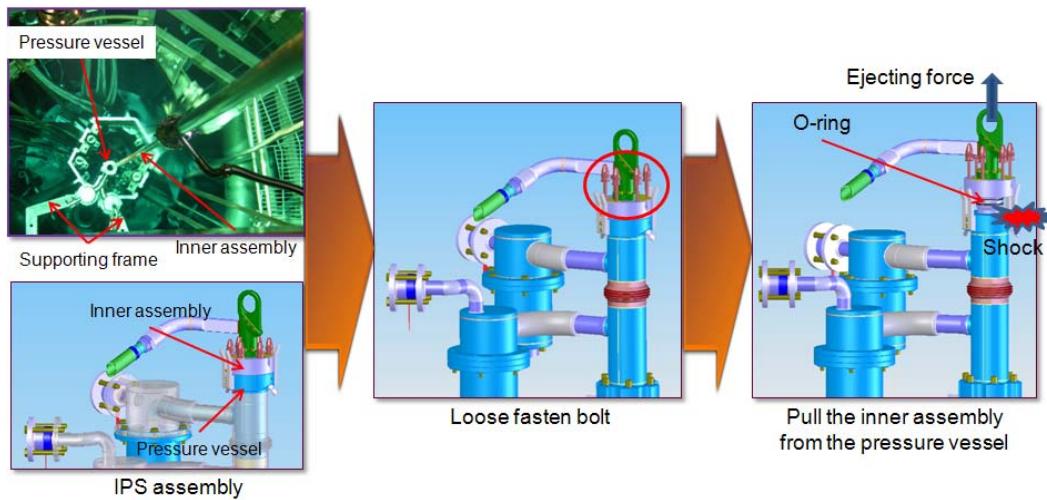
Withdrawal process of the inner assembly from the pressure vessel
